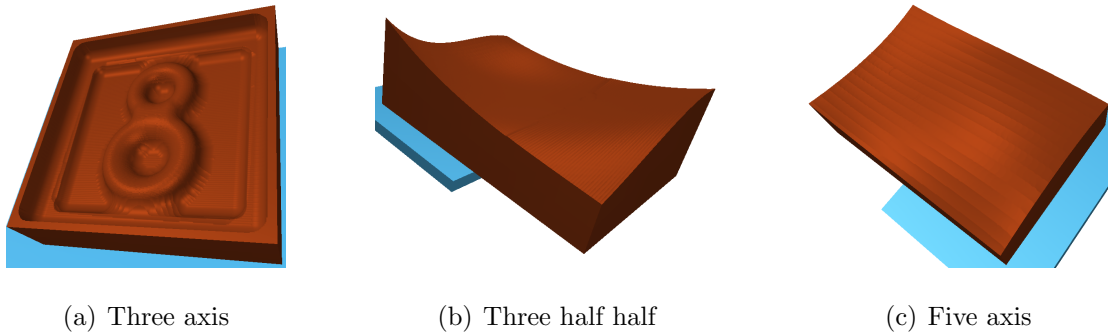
ToolSim milled surfaces used in physical comparison tests.
